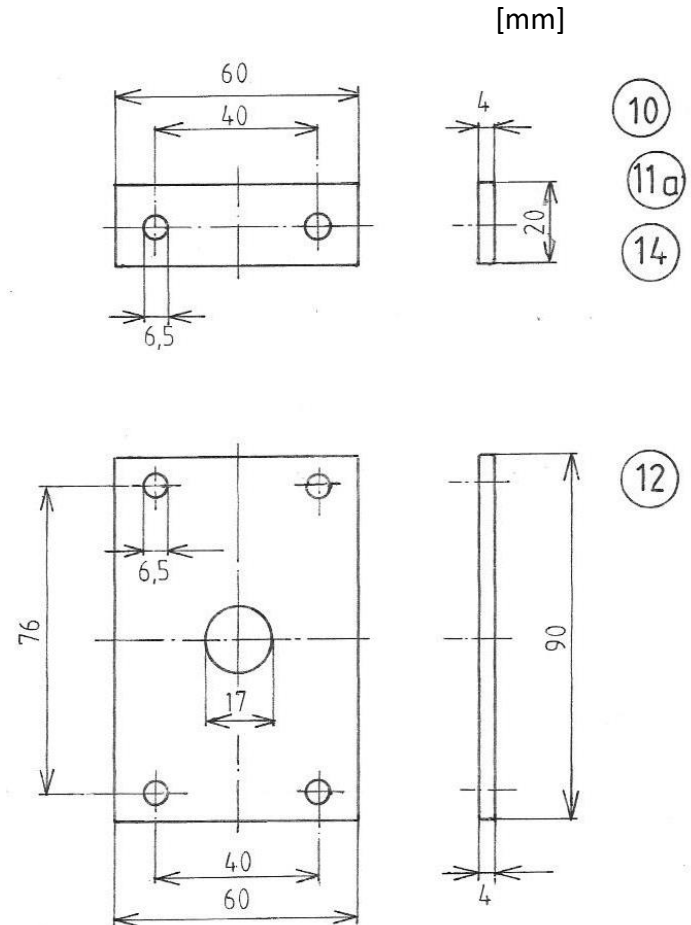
Axis Fastener (10), Fastener for Bearing Plate (11a), Friction Ring Holder (14), and Pressure Plate (12)
